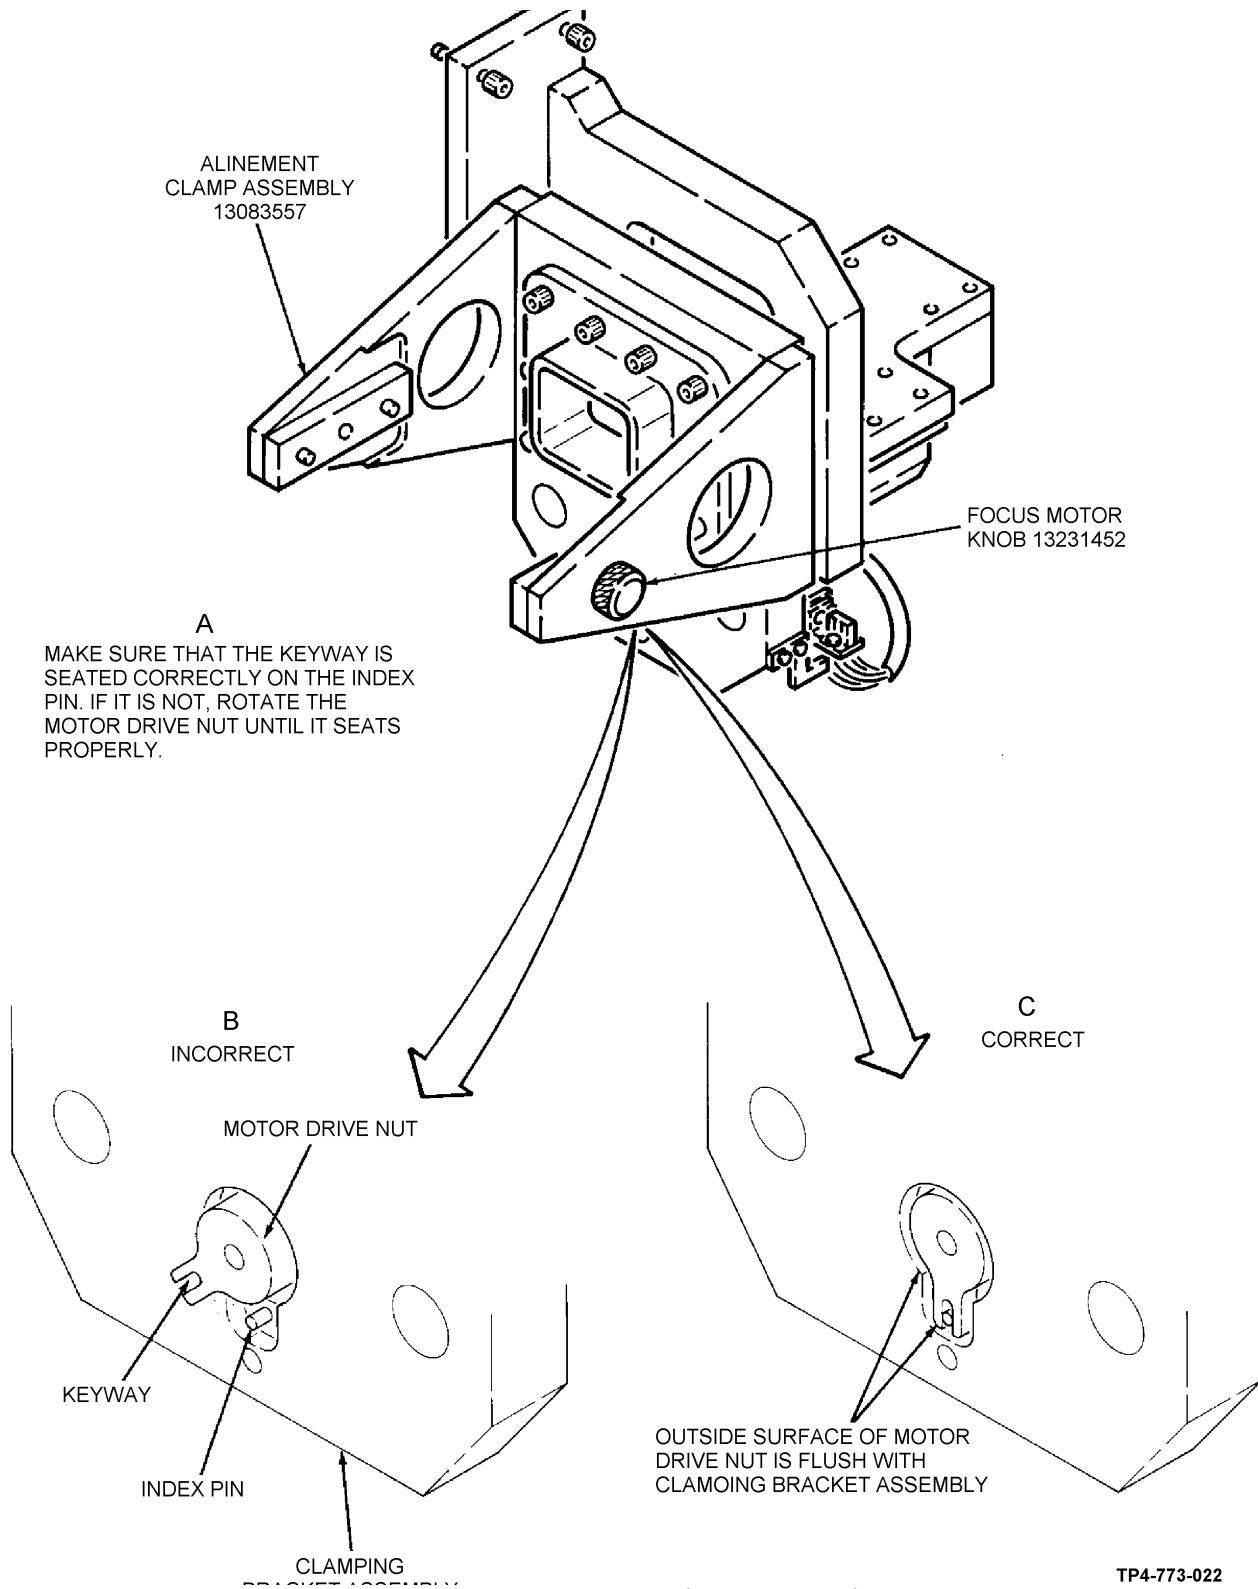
Mounting Bracket (Focus Motor) Assembly
